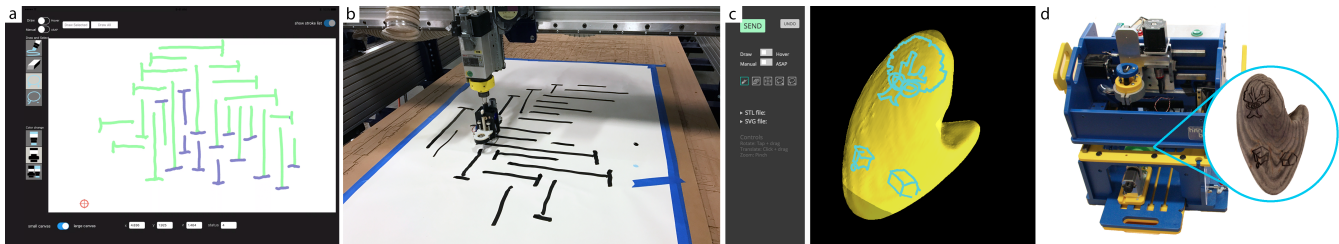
LINC's interface enables interactive CNC drawing and engraving. (a) The 2D design tool. (b) The modified large-scale CNC router that fabricates artworks. (c) The 3D design tool. (d) The engraved object mounted inside a desktop CNC router.
